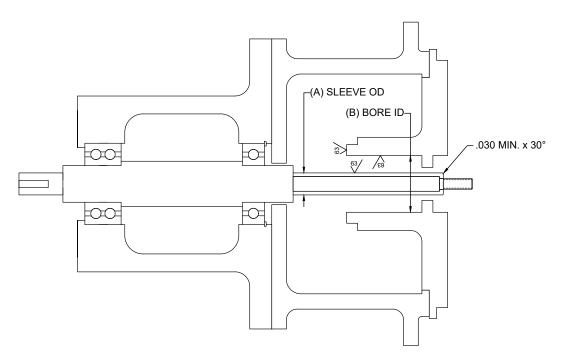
Surface finish and chamfer locations. Fully assembled pump without seal.
